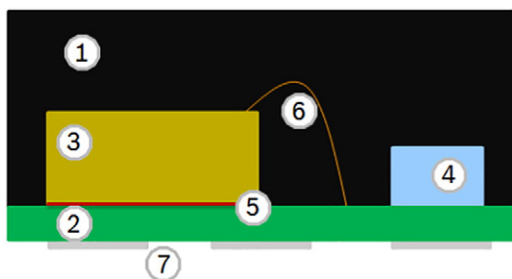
Construction of LGA Package. 1 – mold, 2 – PCB, 3 – stress sensor, 4 – ceramic, 5 – die attach, 6 – wire bond, 7 – soldering pads.
